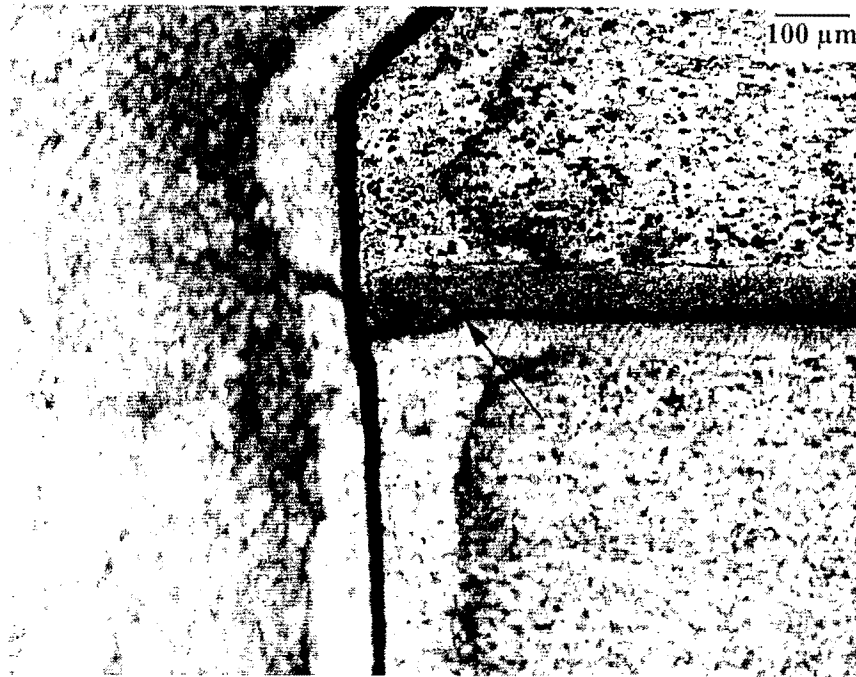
Photomicrograph illustrating defect in cladding material on the fayed surface near the knife edge of the rivet hole
